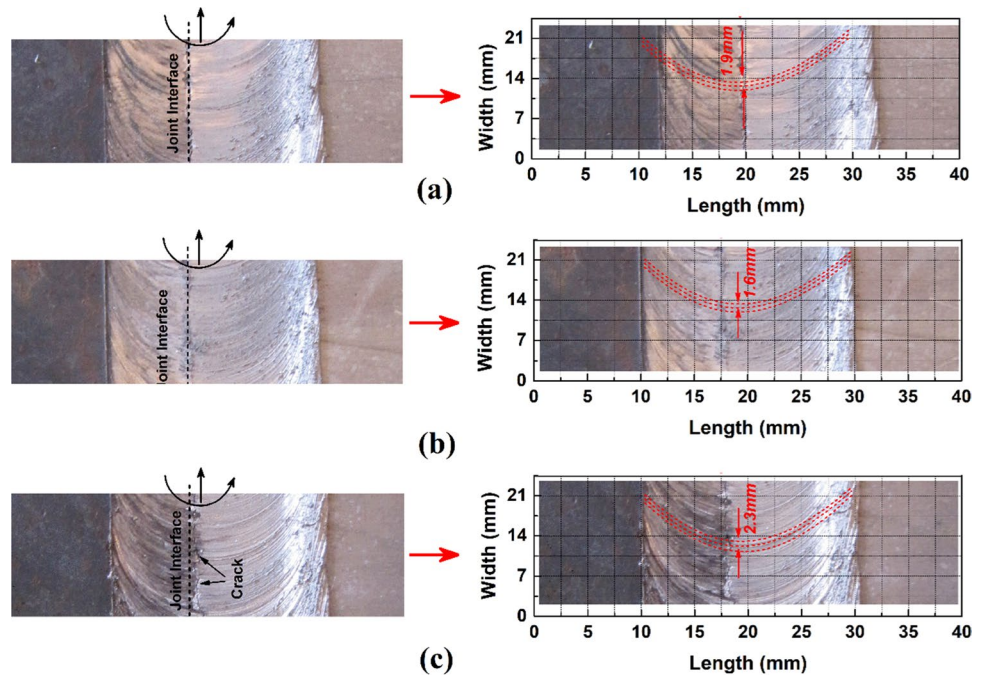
The surface flow of joints welded by a Tool I, b Tool II, and c Tool IV
